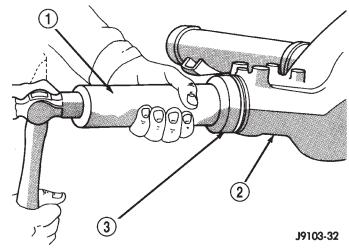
Pinion Seal Installation—8 1/4 Axle
